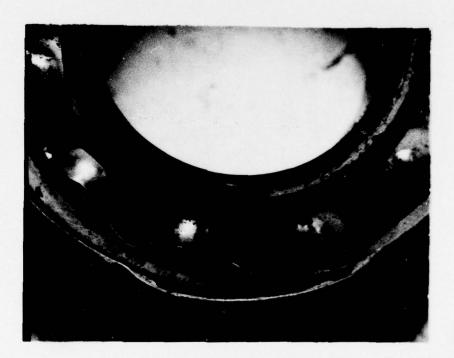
Bearing S/N TRL-4. 3x Enlarged View.
